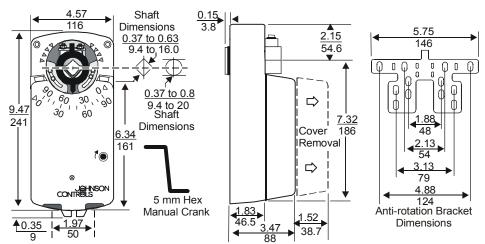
Actuator, Anti-rotation Bracket, and Manual Crank Dimensions, in. (mm)
